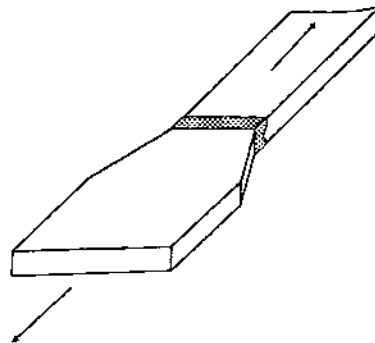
UKDEn Transverse Butt Weld 2
